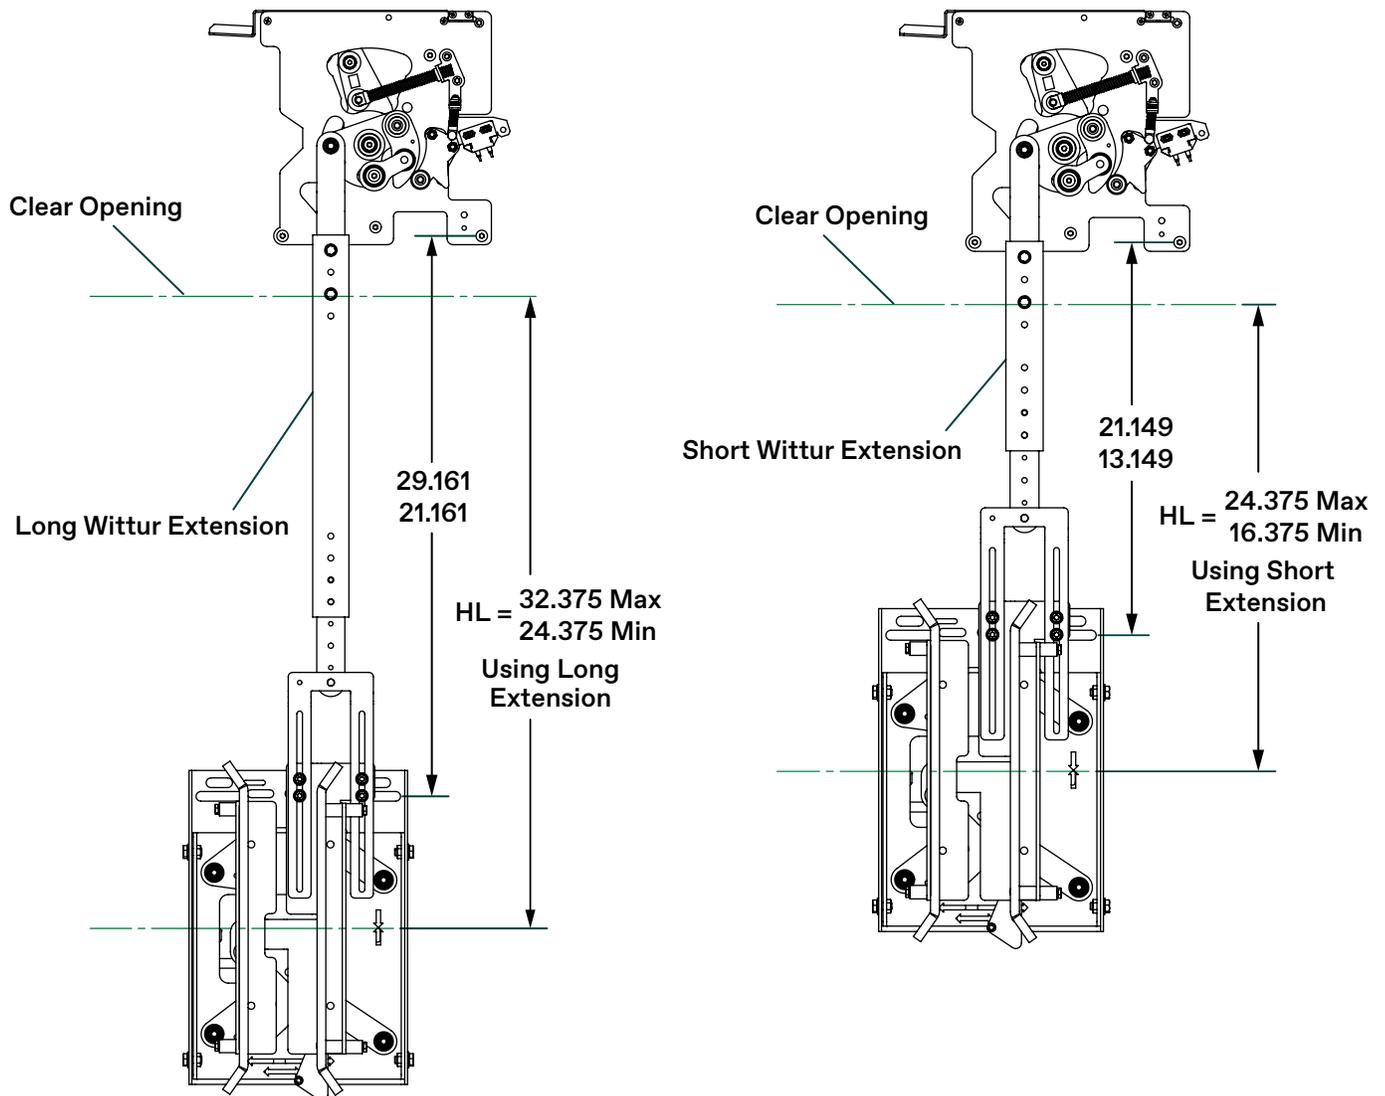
Adjust Clutch and Linkage - Short and Long Wittur Extensions
